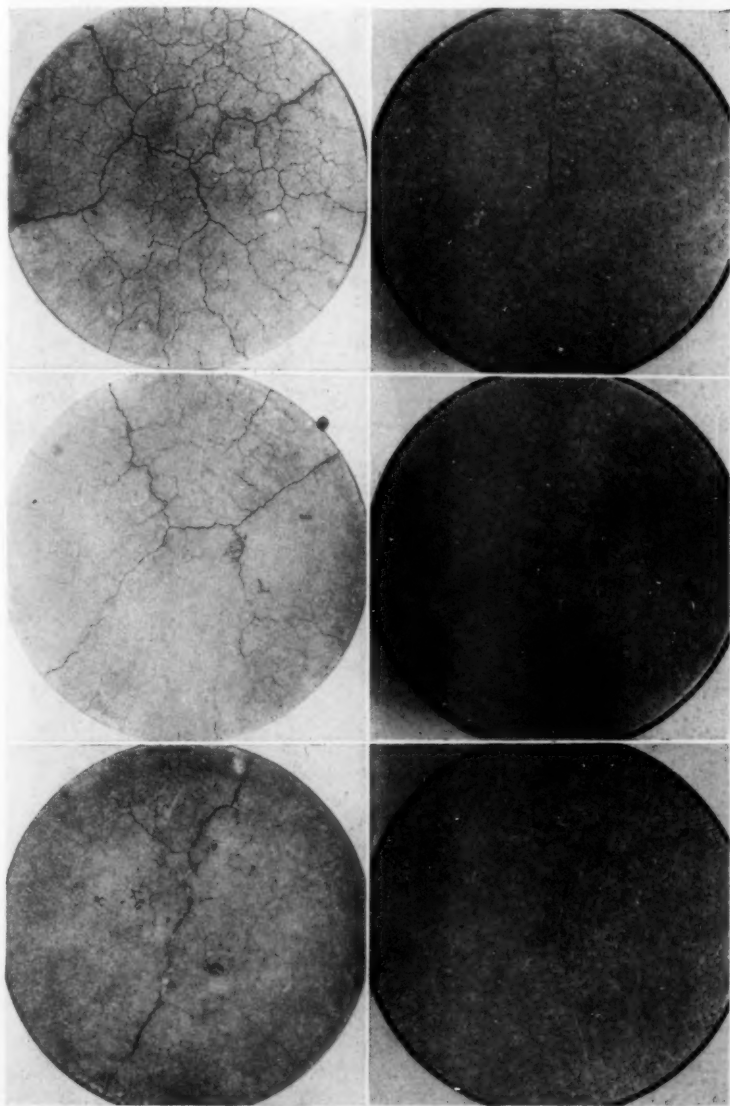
APPEARANCE OF CHILL-CAST IRON SPECIMENS SUBJECTED TO ACCELERATED CRACKING TEST FOR 20 CYCLES. LEFT—TOP, TF; CENTER, TP1; BOTTOM, TP2. RIGHT—TOP, CA1; CENTER, CA2; BOTTOM, CA3.
